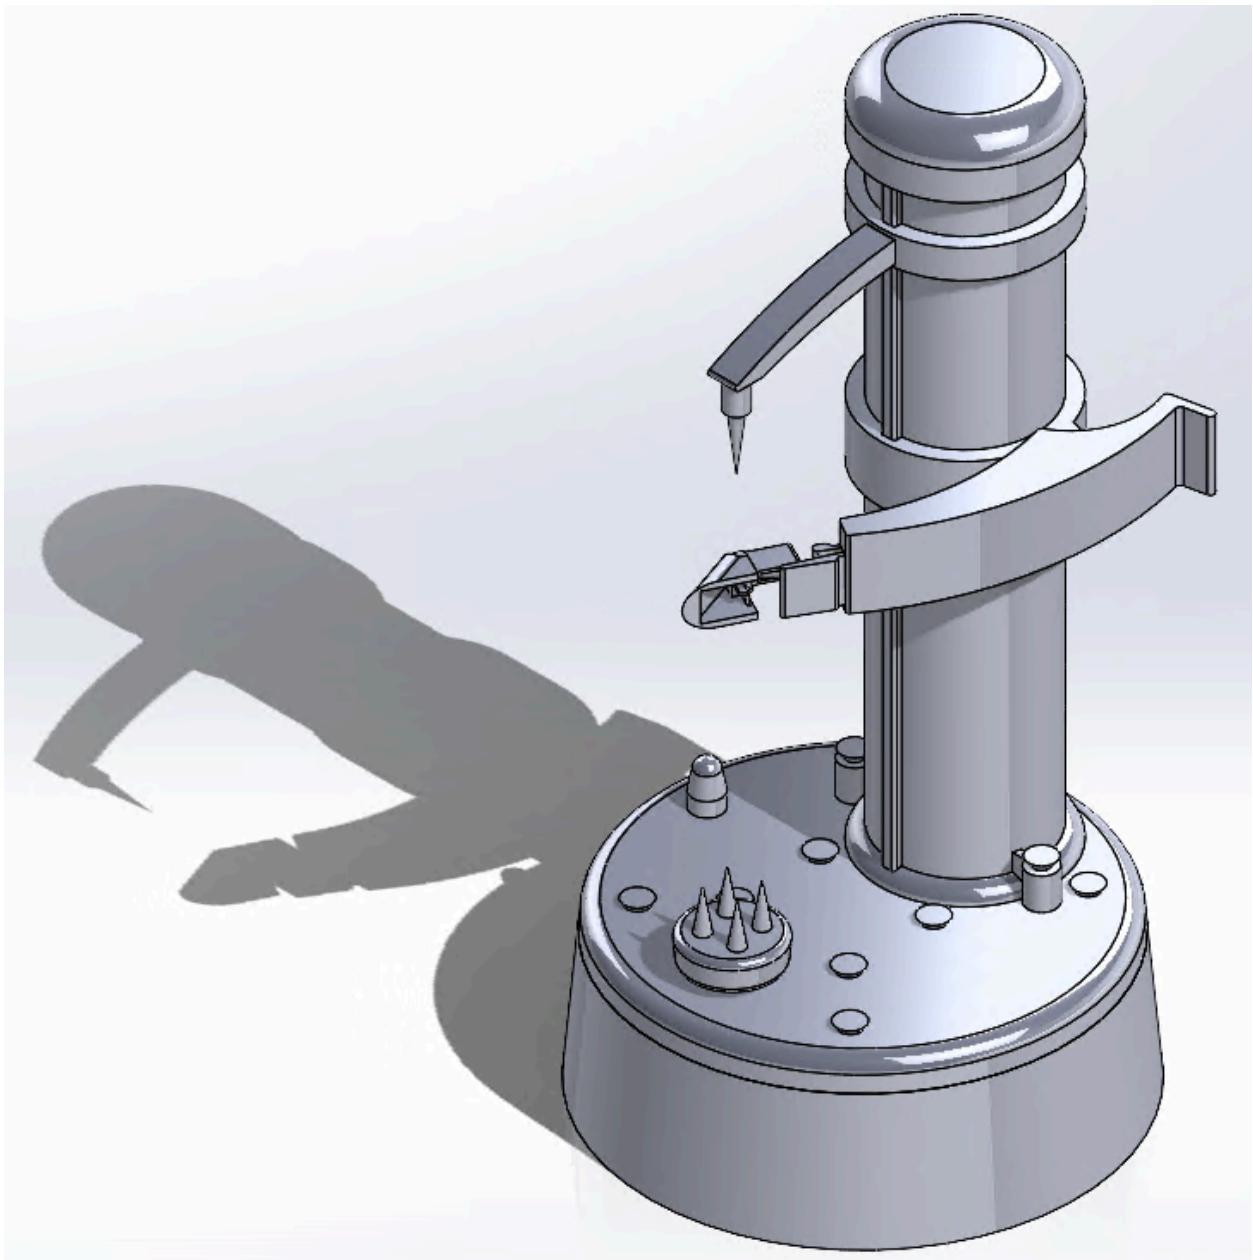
Final Assembly of Kitchen Peeler (Before DFA)
